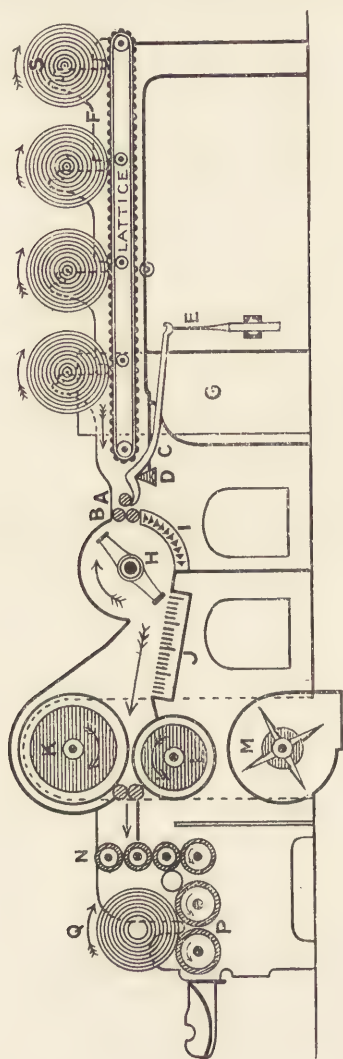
SECTION OF A SCUTCHING MACHINE.
